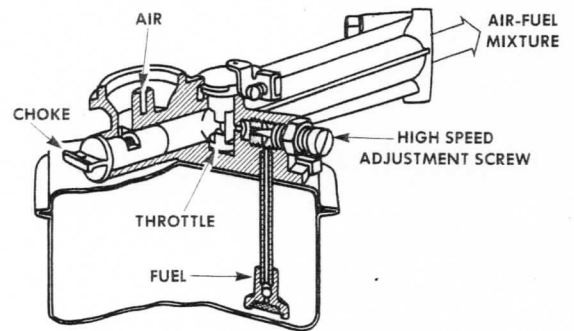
Air going through the carburetor causes a vacuum that pulls fuel out of the fuel tank. (Briggs & Stratton Corp.)
